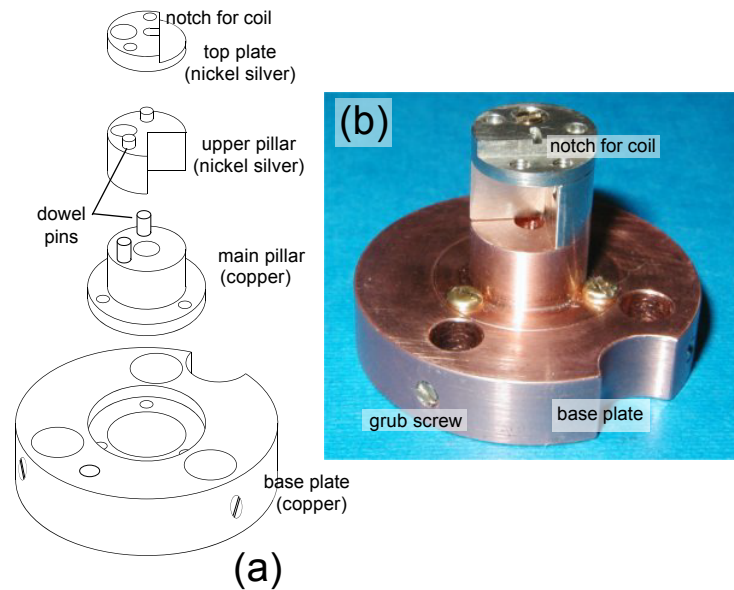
Design and construction of cantilever mount #3. (a) Exploded diagram showing the component parts of the mount. (b) The completed and assembled mount.
